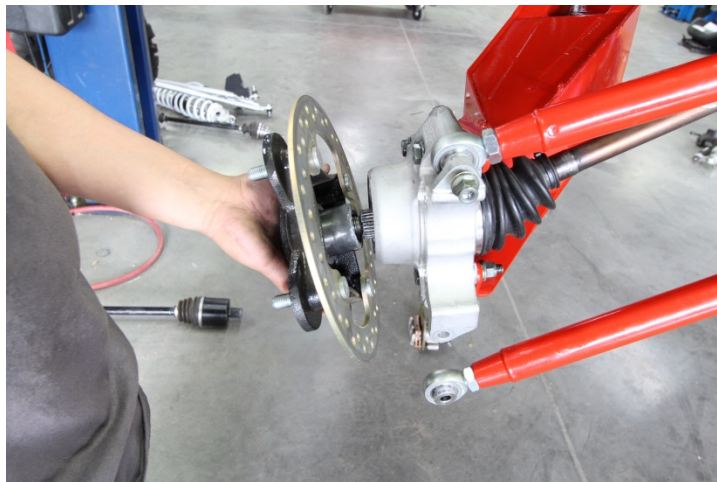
Bolt spindle bearing carriers to Cognito trailing arms.
